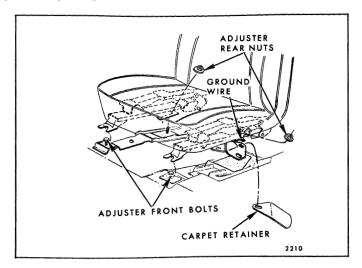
Bucket Seat Floor Rear Attachment -"A" Styles
